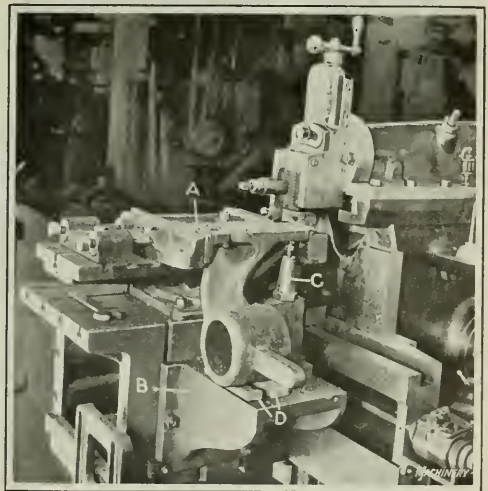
Planing and tonguing the Face of a Grinding Machine Driving Shaft Supporting Bracket
